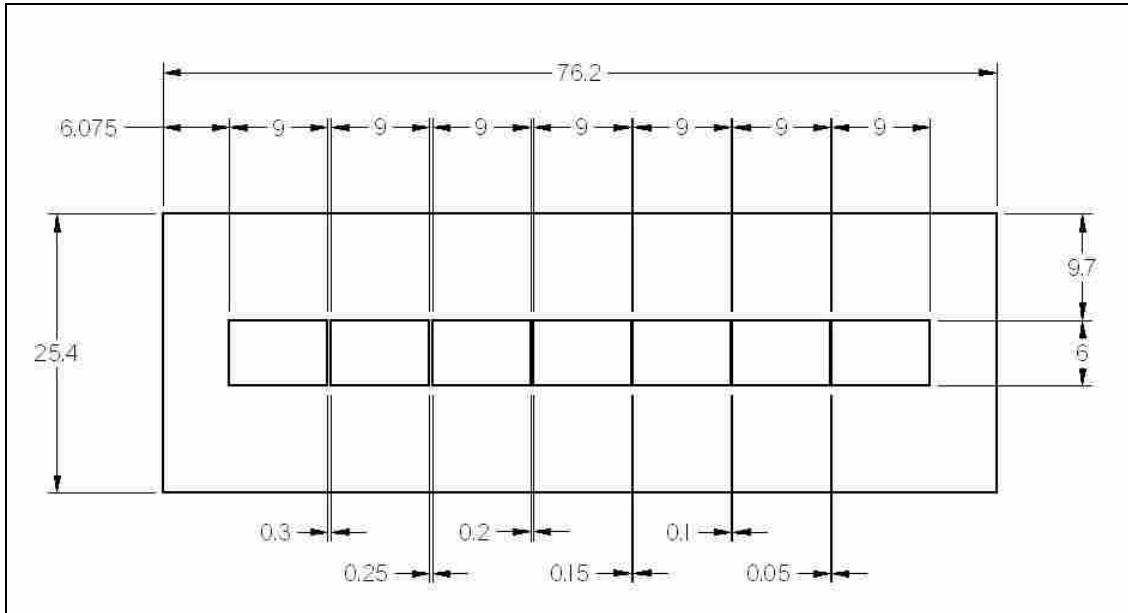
Layout of Thread Holes for the Test Blanks (units: mm)
